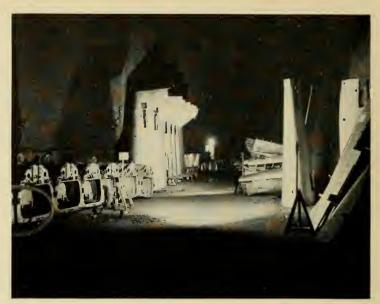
Shiroyama plant. Fuselage assembly.
